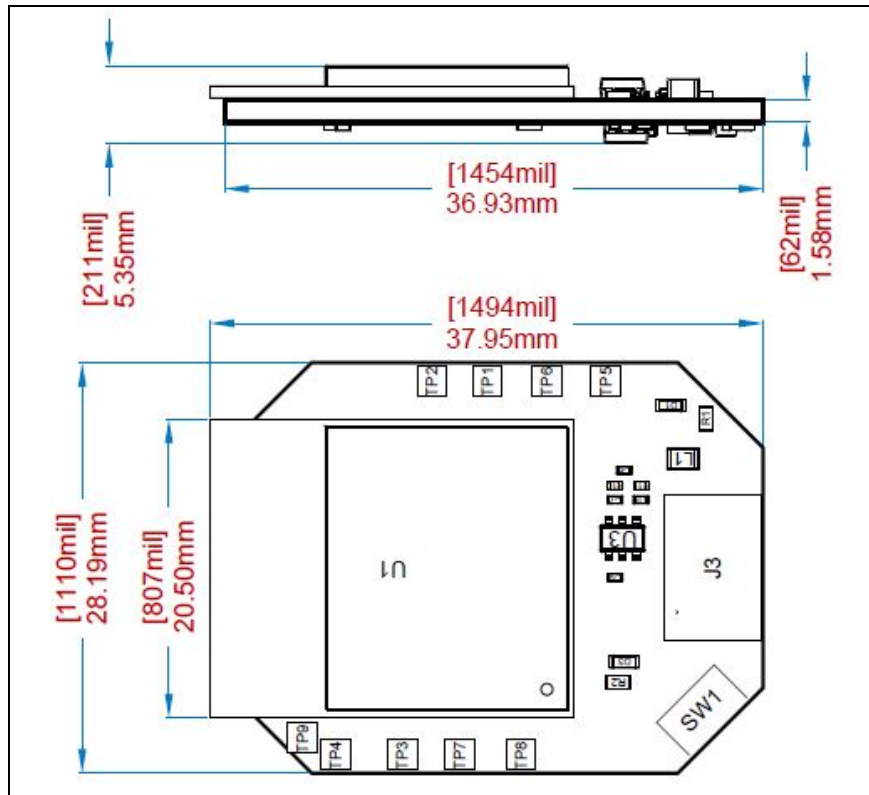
Overall package size of the custom PCB designed in Altium Designer.
